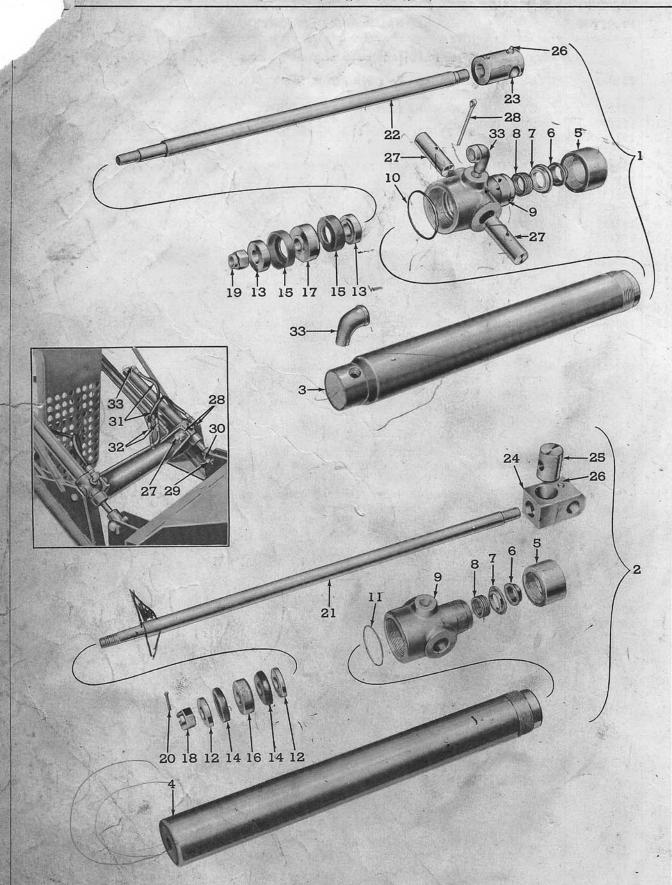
Cylinder Assembly, Bucket Control, for Models 19-42 (Prior), 61 (Prior), 70, 71
